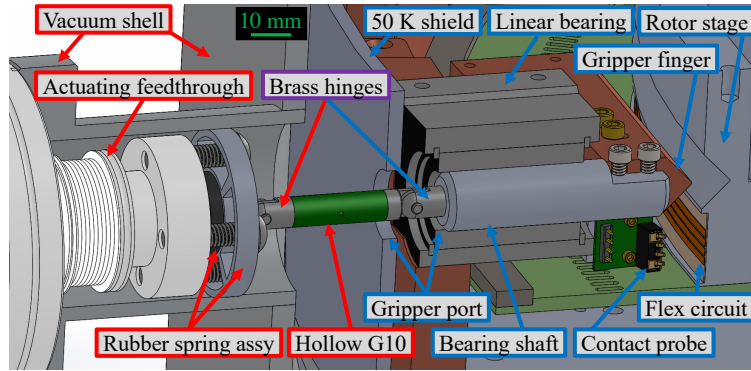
shows a CAD rendering and photographs of a single gripper subassembly. The feedthrough¹⁶ consists of a linear actuator¹⁷ with a vacuum-compatible bellows assembly that mounts to a ConFlat port on the vacuum shell. The feedthrough bolts to a rubber spring assembly, which adds compliance both along and about the radial direction. This spring assembly in turn connects to the gripper arm, which is composed of a hinged thermal
